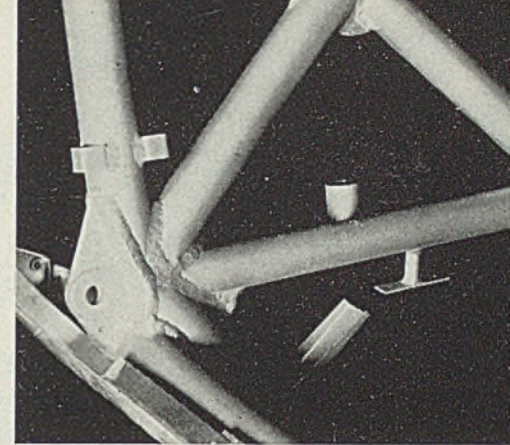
Typical example of joint designs and excellent welding at Vought-Sikorsky. *Aircraft Tubing Data*, by Summerill Tubing Co., Bridgeport, Pa.
